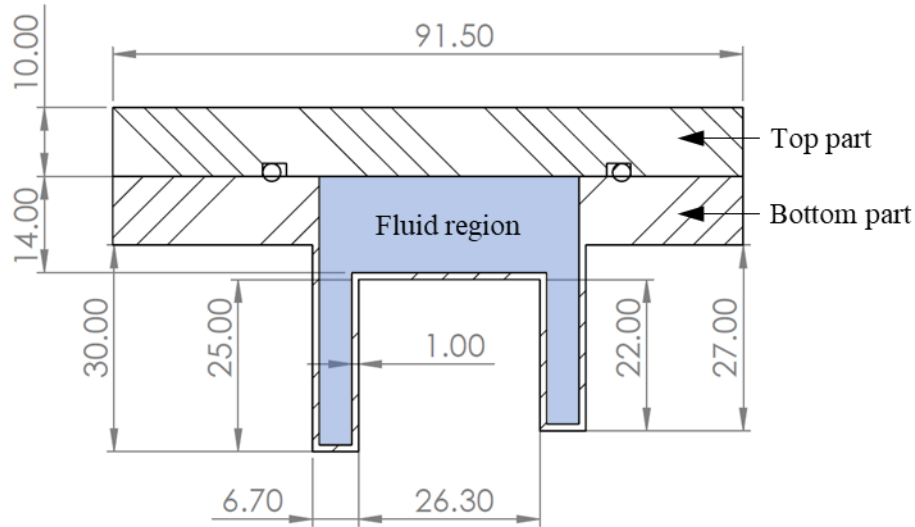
End-winding channel cross-sectional view with dimensions in mm.
